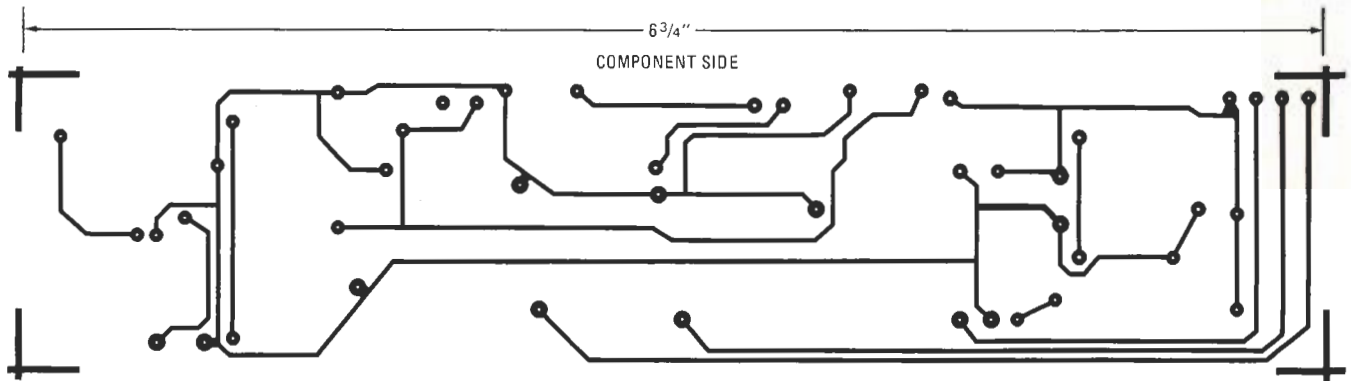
FOIL PATTERN for the component (front) side of the display PC board.
